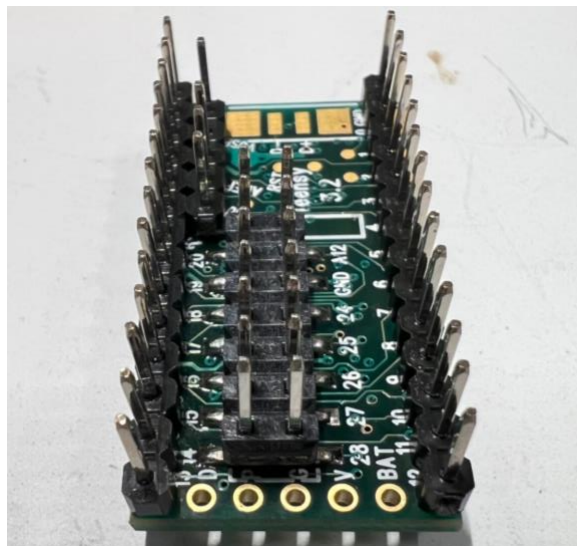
Bottom side of Teensy3.2 board with soldered pins.
